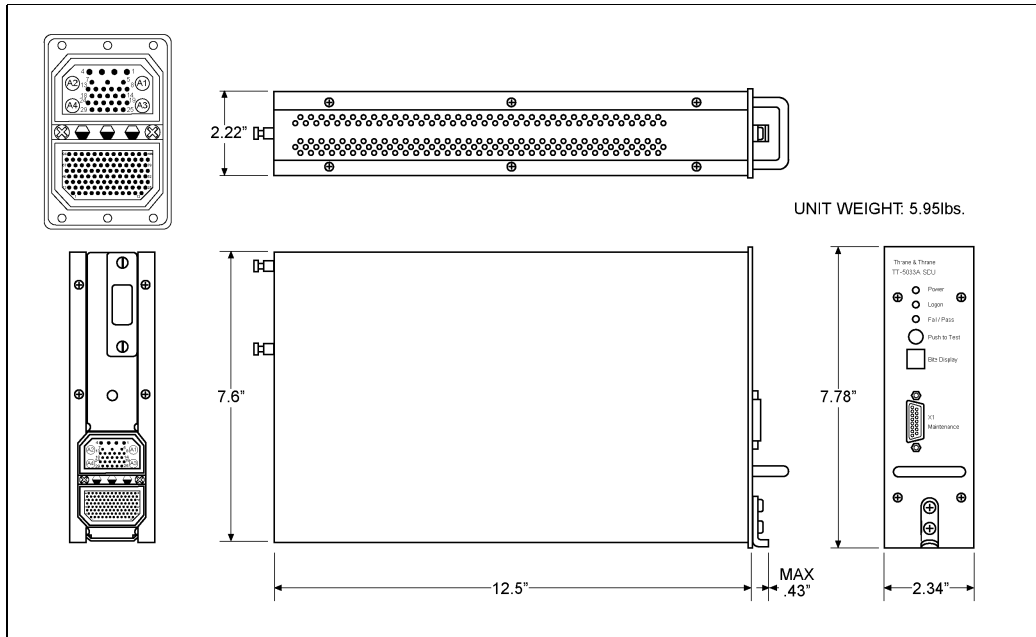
, TT-5033A SDU with TT-5033A-001-THR Configuration Module inserted
